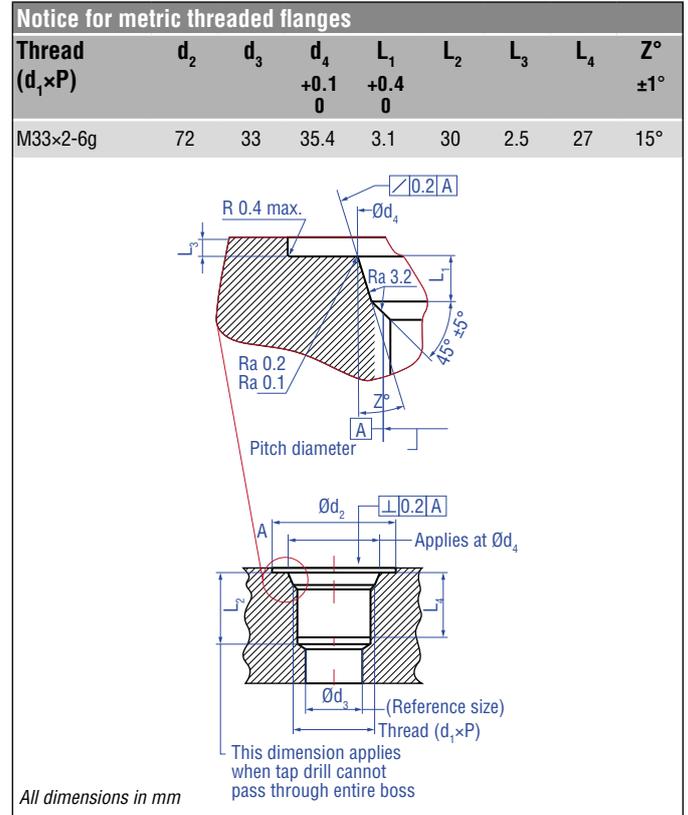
Cavity dimensions for metric threaded flange M33×2-6h
